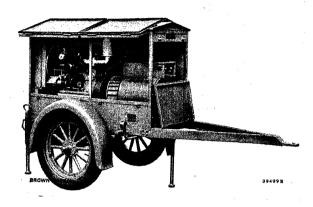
Petrol-electric welding set, Type GBSM designed as a two-wheeled trailer, 30-300 A.
